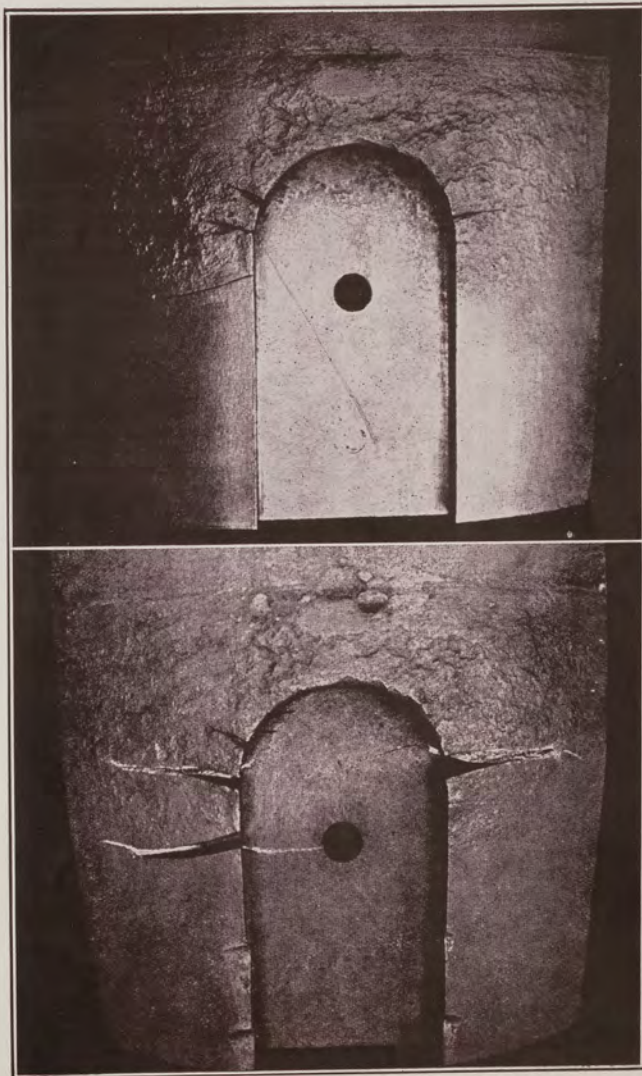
Same shape as in Fig. 2, but showing additional corrosion; fatigue cracks revealed by bending shaft.
